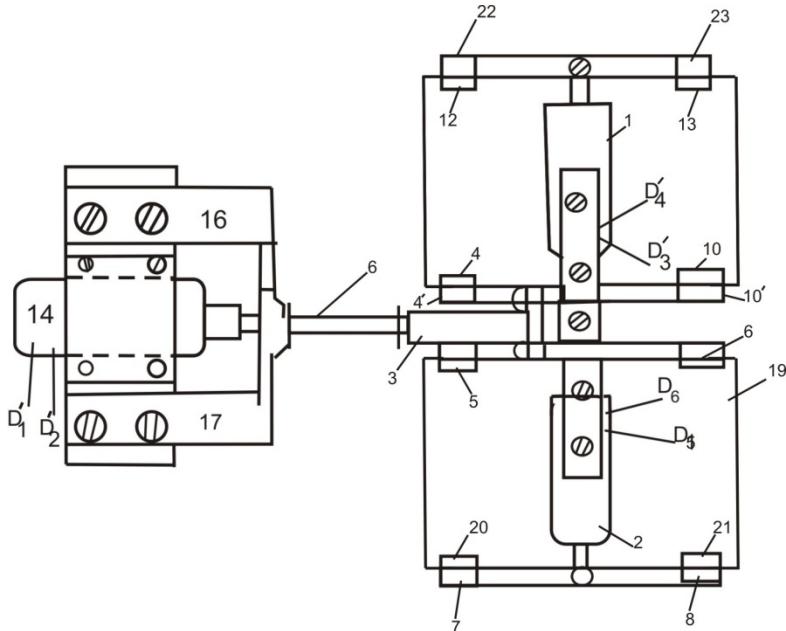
Oven-dried sheets to step conveyor moving manipulator
